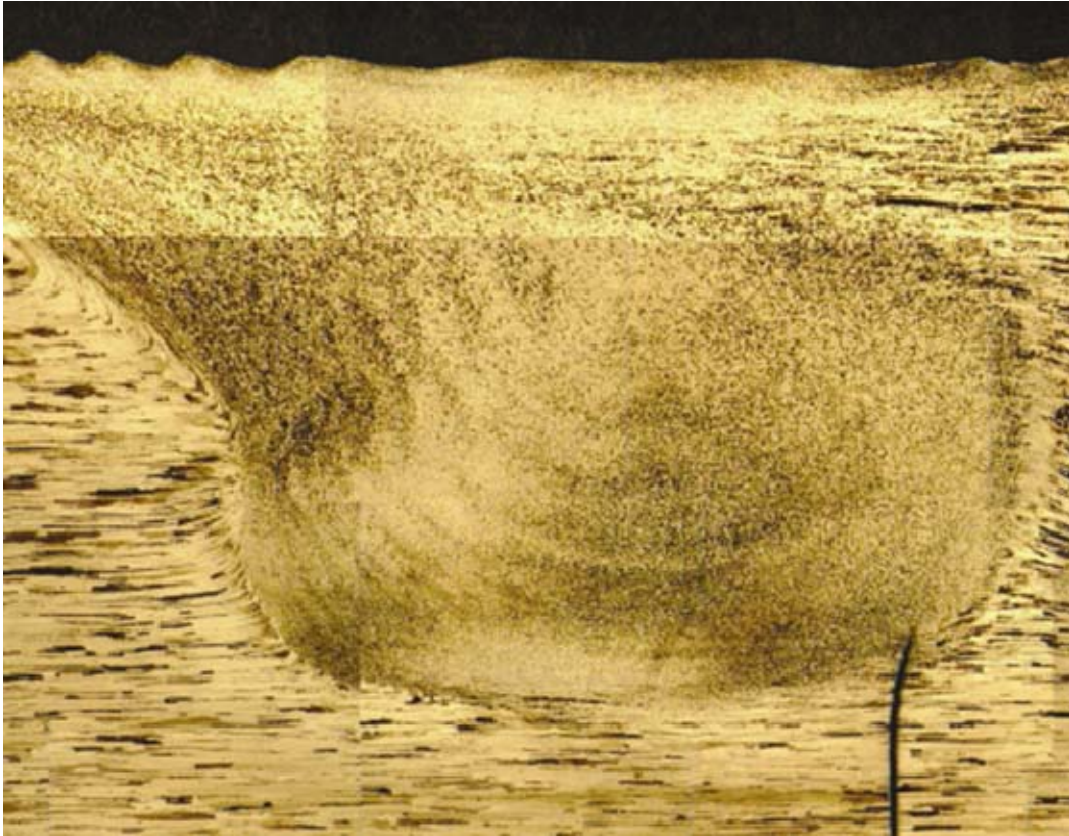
Transverse View of unanodized to unanodized, weld location on the retreating side with a standard tool. (sample 1109)
